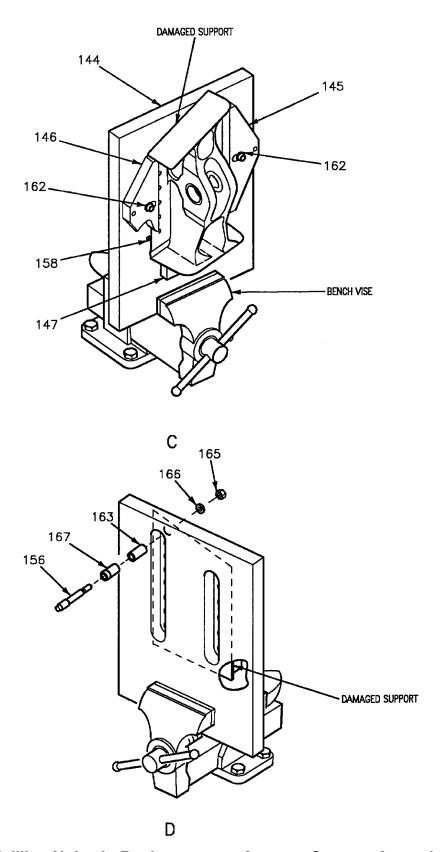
Drilling Holes in Replacement 74A110964 Support Assembly (Sheet 2)
